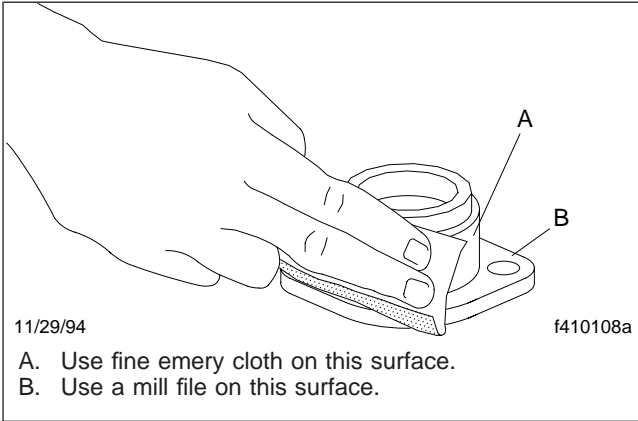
, Smoothing a Full-Round Yoke U-Joint Bearing Cup
